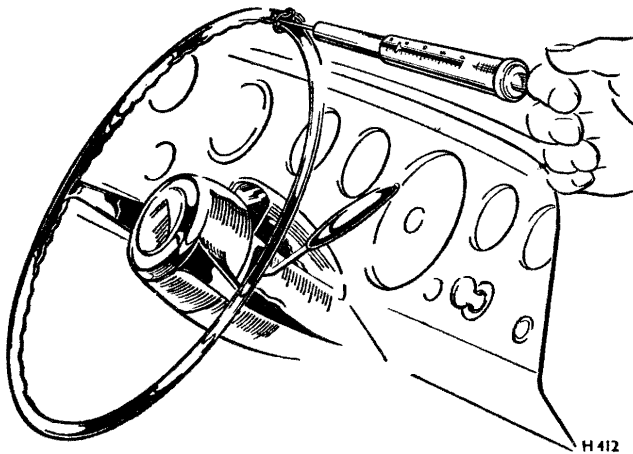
CHECKING THE STEERING BOX PRE-LOAD
